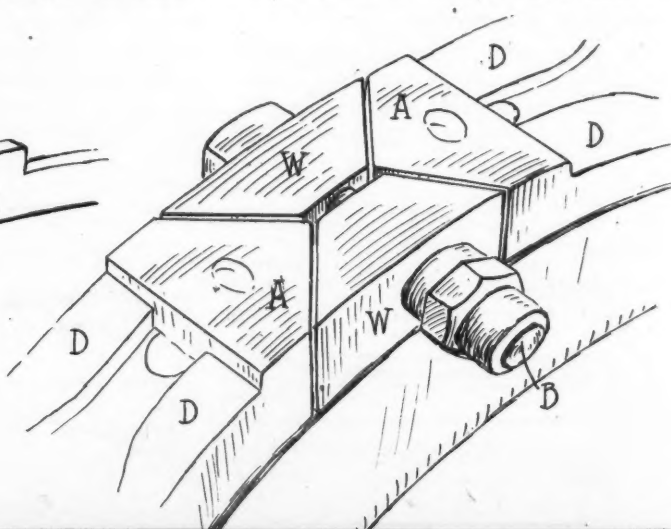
THE DENEGRE DEMOUNTABLE. W AND W ARE WEDGES BROUGHT TOGETHER BY BOLT B; A AND A ARE BLOCKS ON BAND; D, D ARE TAPERED WEDGES
